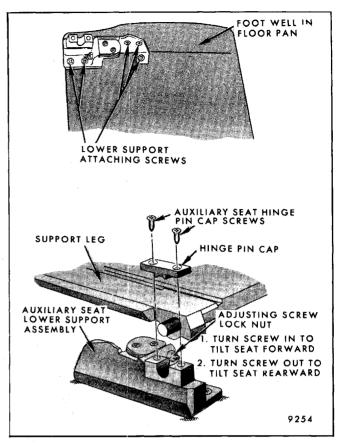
Auxiliary Seat Lower Support and Adjustment -Cadillac Limousine Styles
